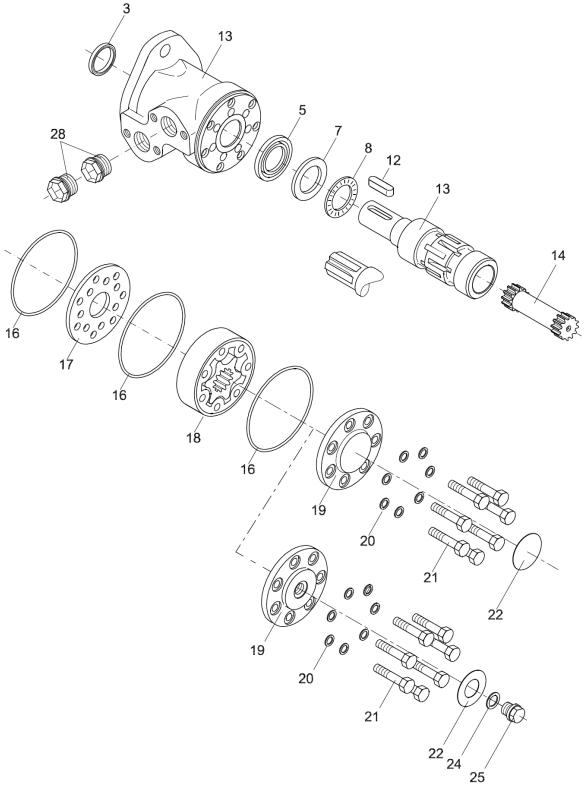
OMP Metric version, Series 8 with Integrated Spigot Flange Exploded view
